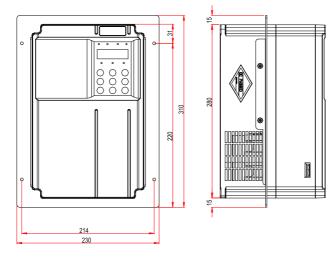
Dimensions of through hole mounting bracket and hole of MD500ET7.5GB to MD500ET11GB
